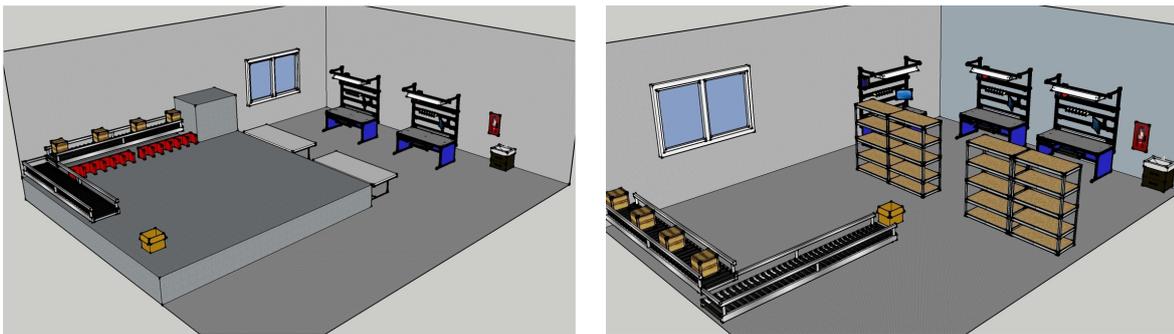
Draft of construction, to be discussed; floorplanes have the size of a standardized Euro pallet (1200x800mm);
